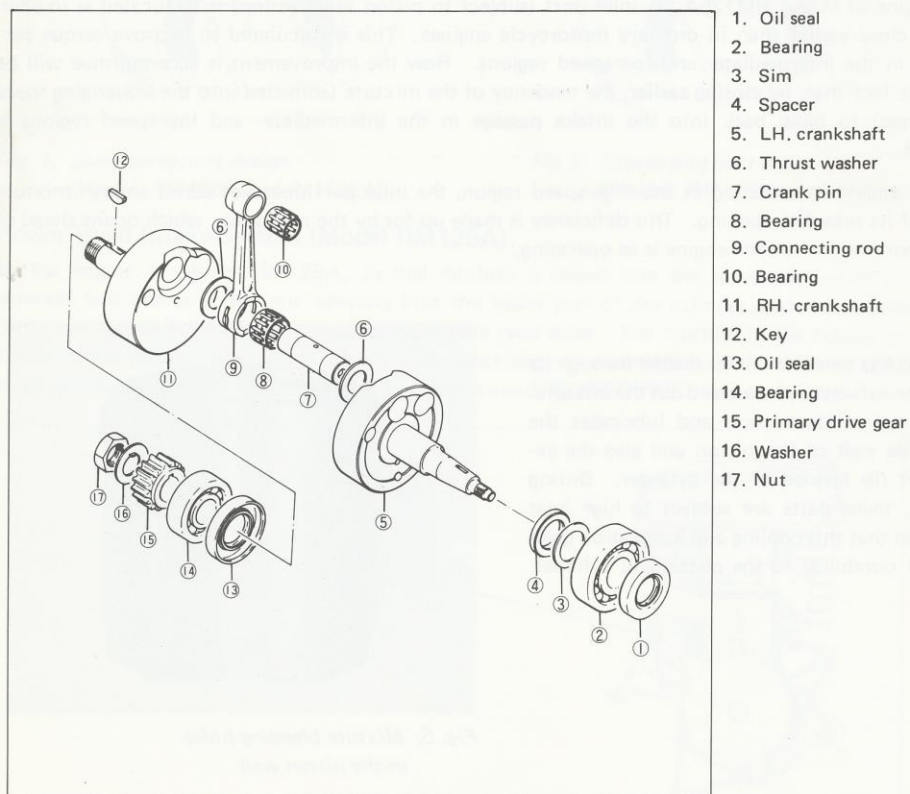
Crankshaft assembly for RM100A, RM125M and RM125S
